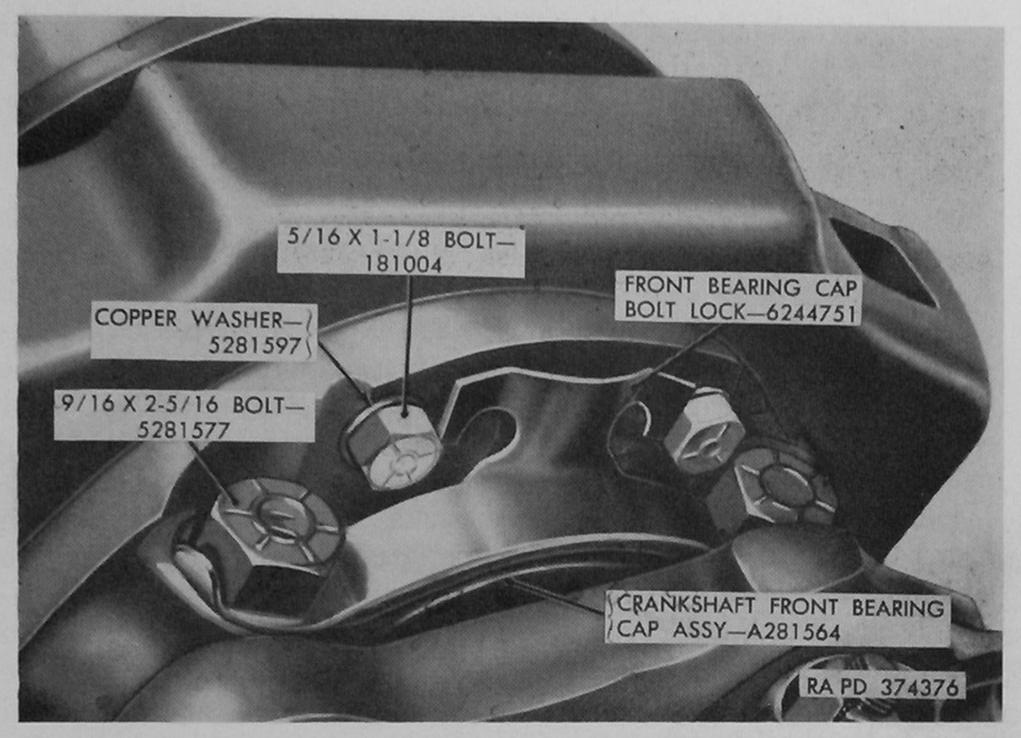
Crankshaft front bearing cap bolt lock—early engine assemblies 7411599 and 8329440.
